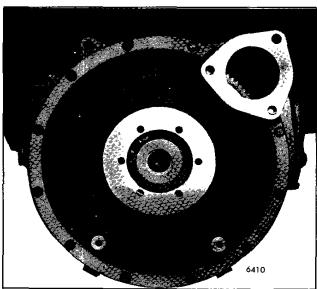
Marine Flywheel Housing Adaptor Cover
